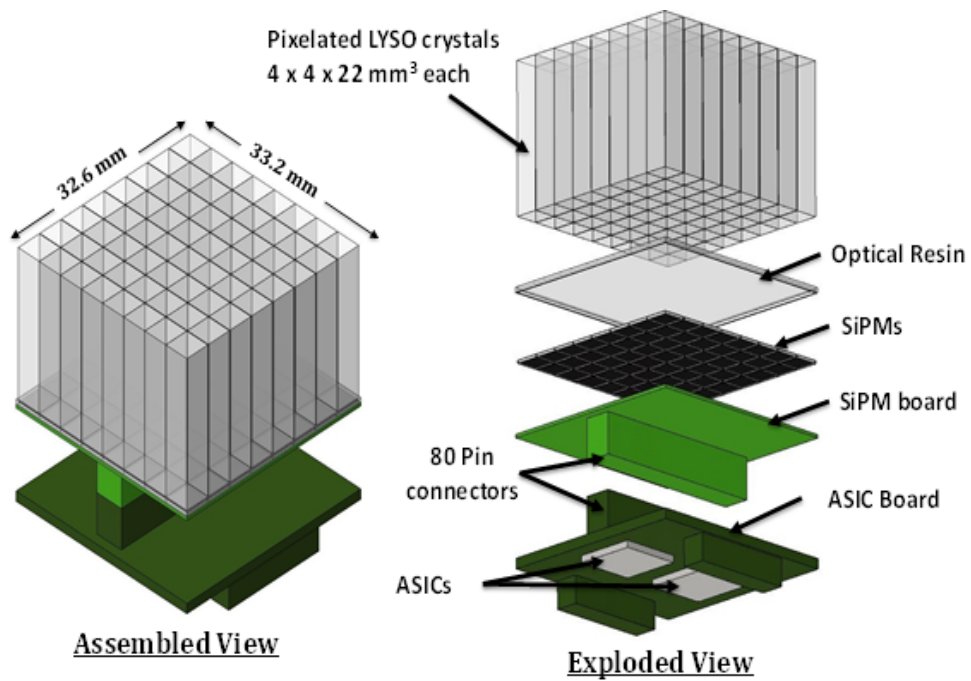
Assembled view of a single module (right) and exploded view (left).
